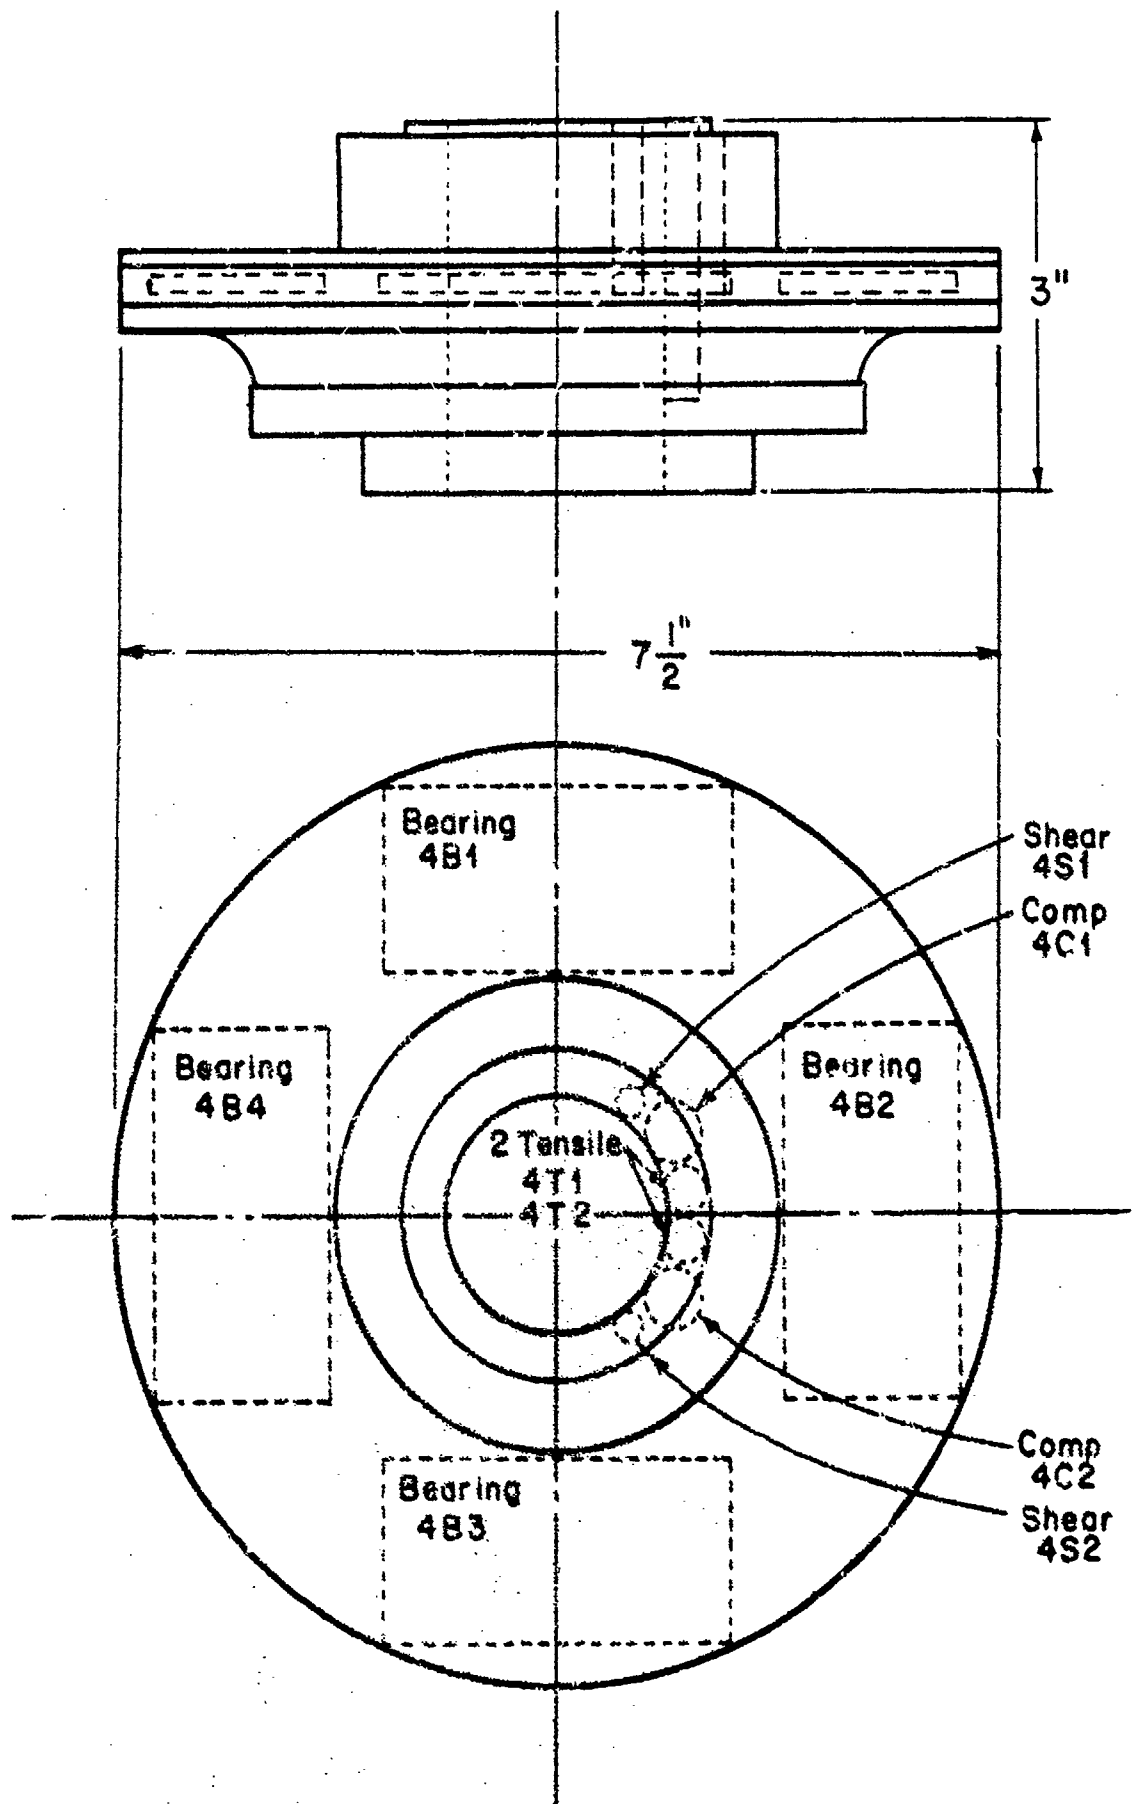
Location of test specimens for 15-5PH (H935) Impeller #1 casting.
